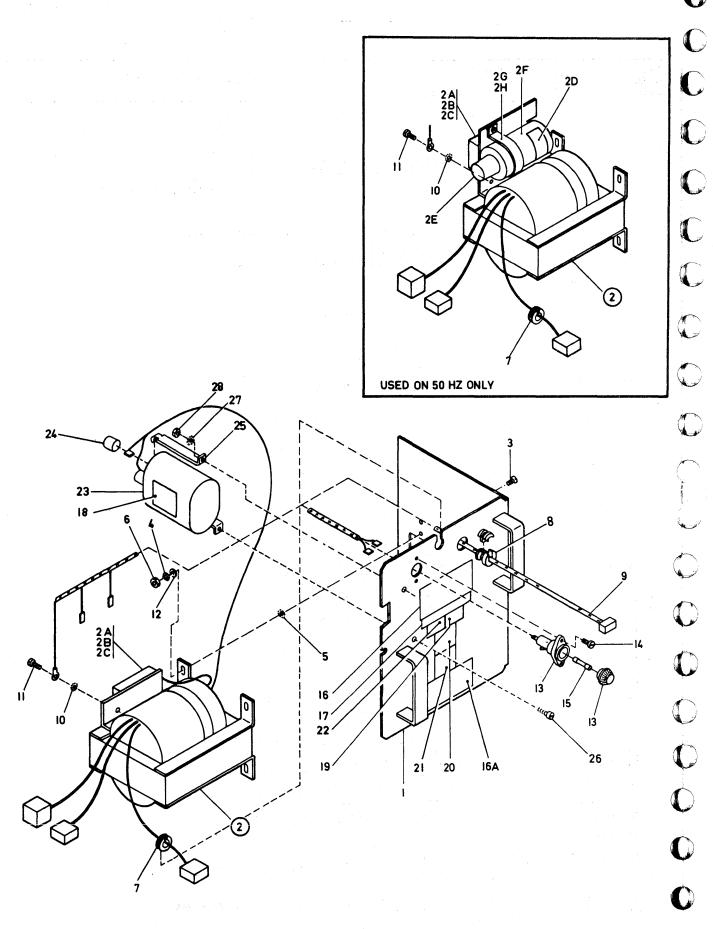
TRANSFORMER ASSEMBLY, TR 104, PDL 4
